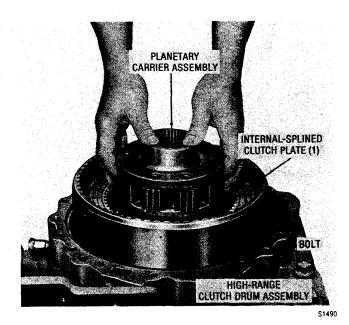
Installing low-range planetary carrier assembly (TRT-3 underdrive)
